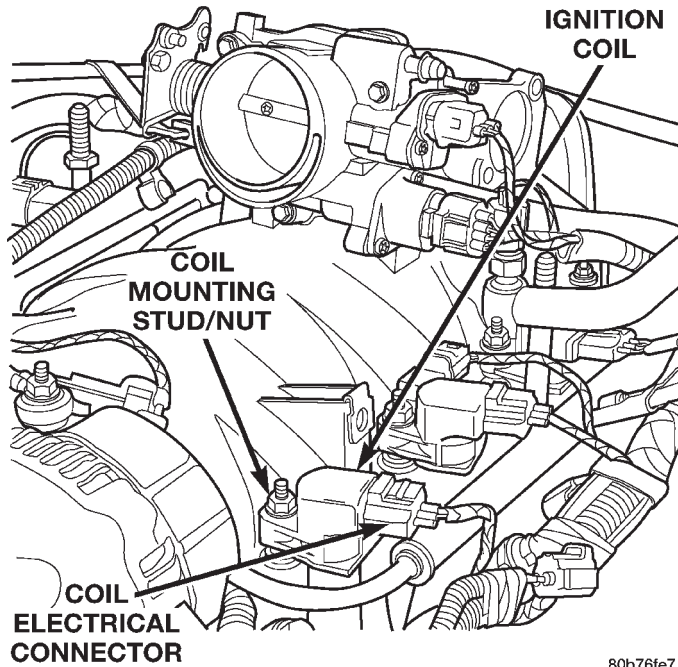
Ignition Coil Connector—4.7L V-8 Engine
